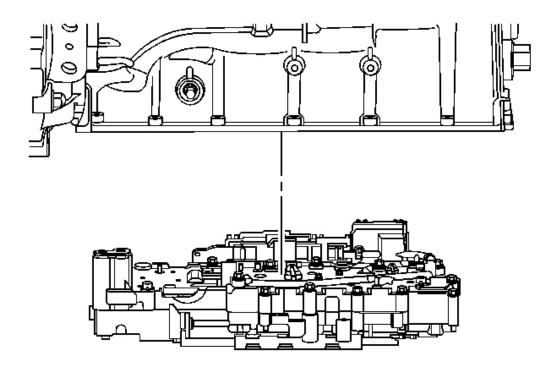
Valve Body Assembly Courtesy of GENERAL MOTORS CORP.
